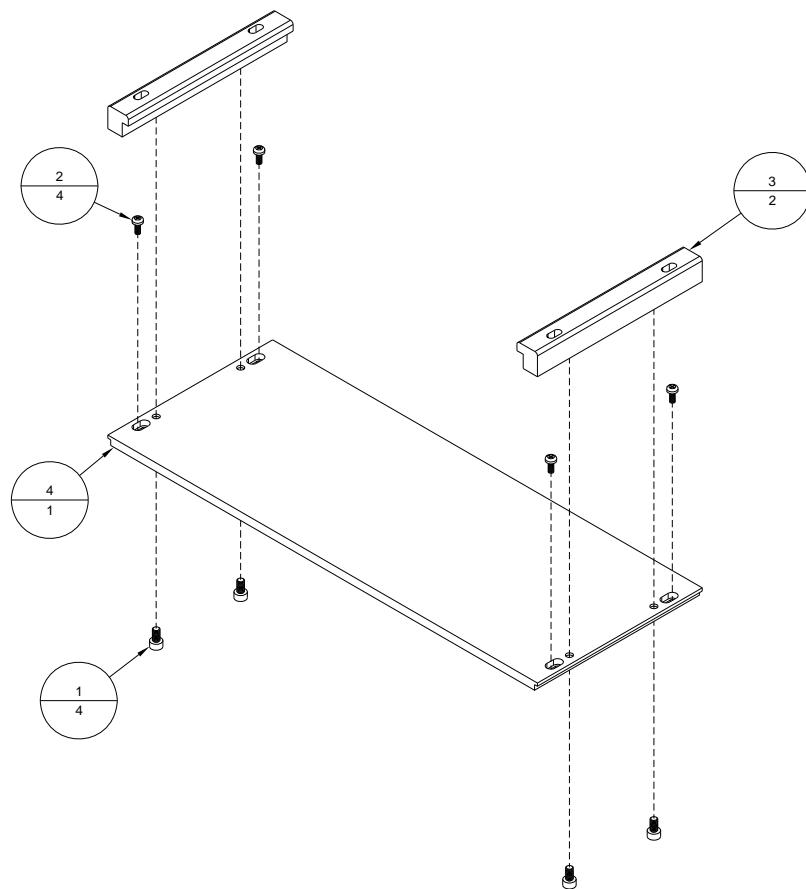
9103568A – Cover Assembly, Blind Module
